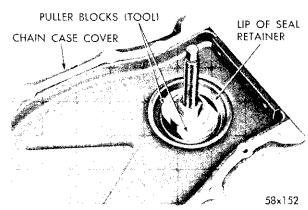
Removing Timing Chain Case Cover Oil Seal Using Tool C-3506
